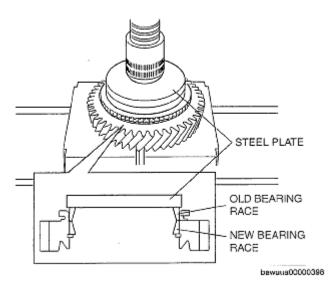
Installing Bearing Race Outer To Counter Drive Gear Courtesy of MAZDA MOTORS CORP.
